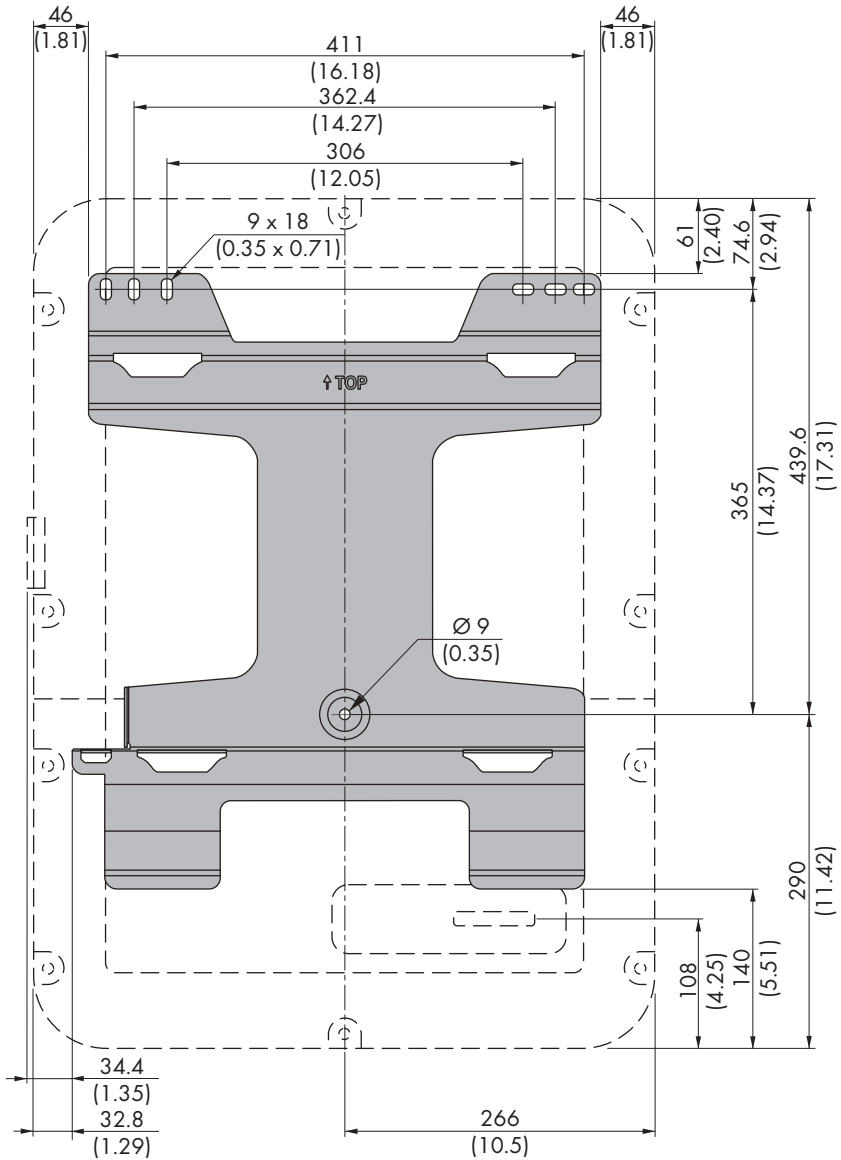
Position of the anchoring points(Dimensions in mm (in))
